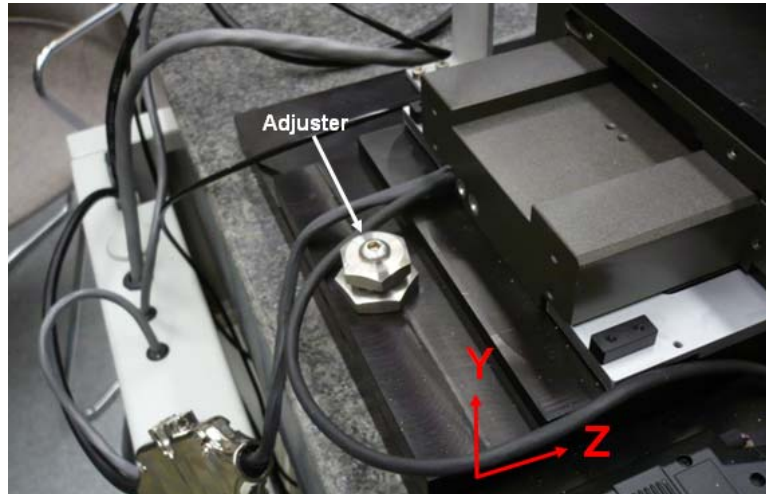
Adjustment of R/Z parallelism in the y-direction is performed via the single adjuster at the rear of the Z-axis base plate.
